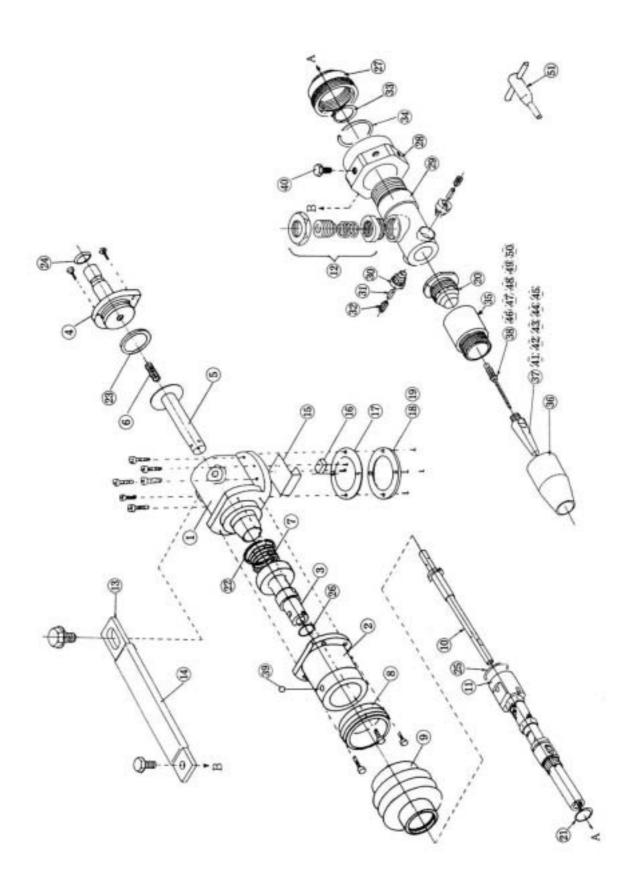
Exploded diagram of forced pressure power feeding torch equipped with shock sensor [MTZ-3502]
